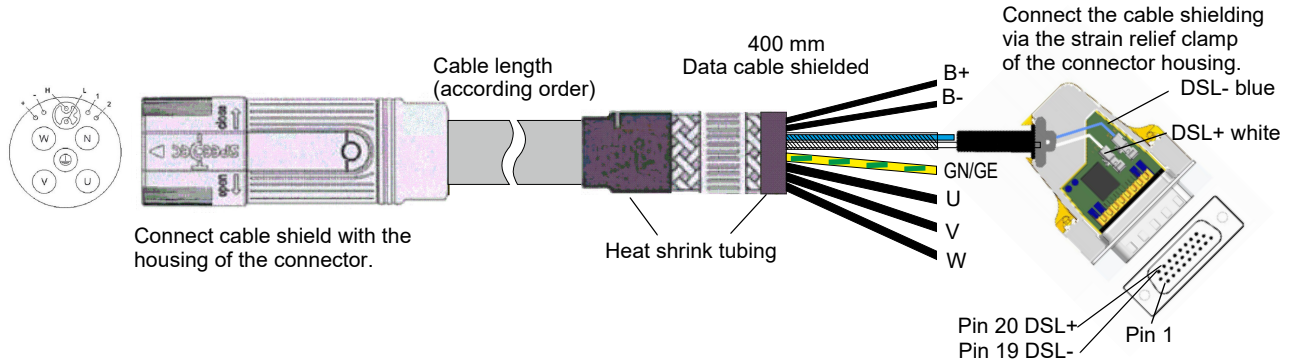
Motor cable with HIPERFACE DSL® 36 A
